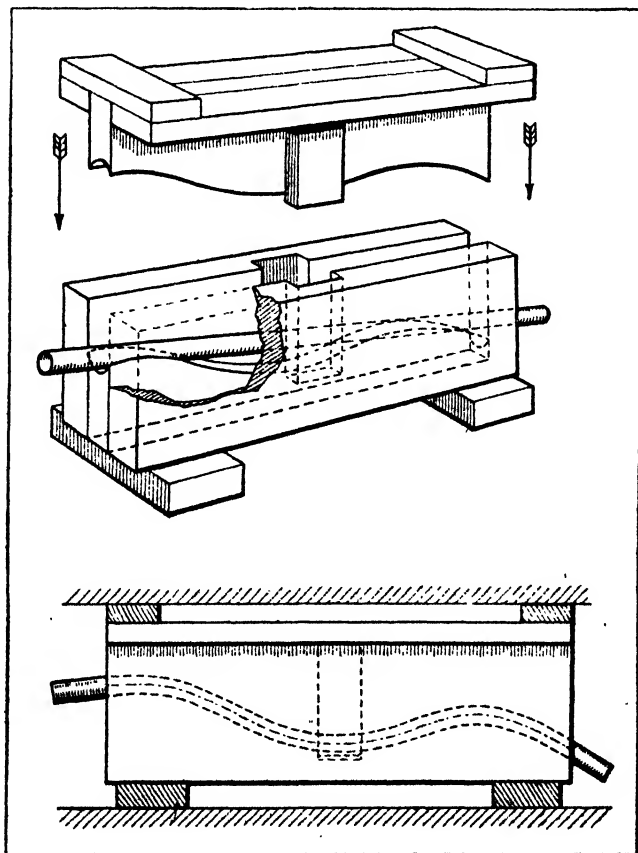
Press tools for simple bends without the use of helical-faced or cam-action formers.
